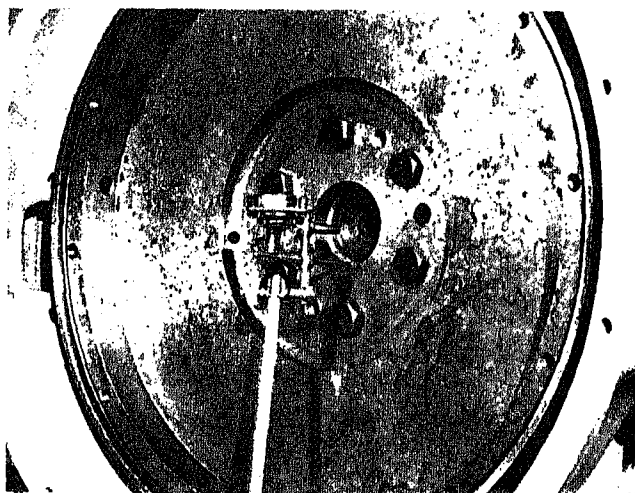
Indicating flywheel clutch bearing bore
